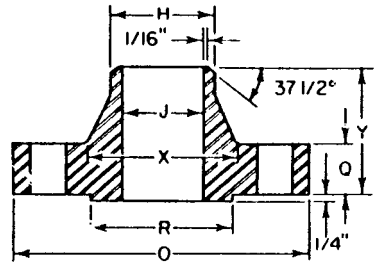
Typical integral flange (welding neck flange).
